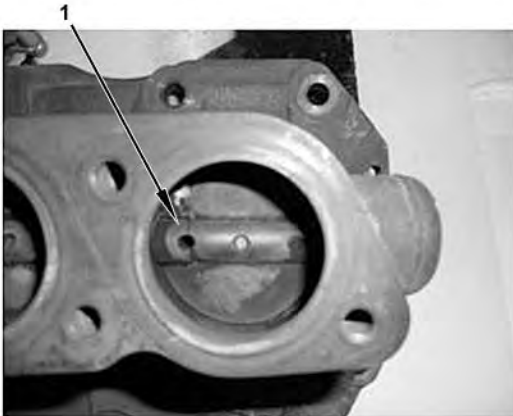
EGR Valve Missing Screw and Cracked Shaft
